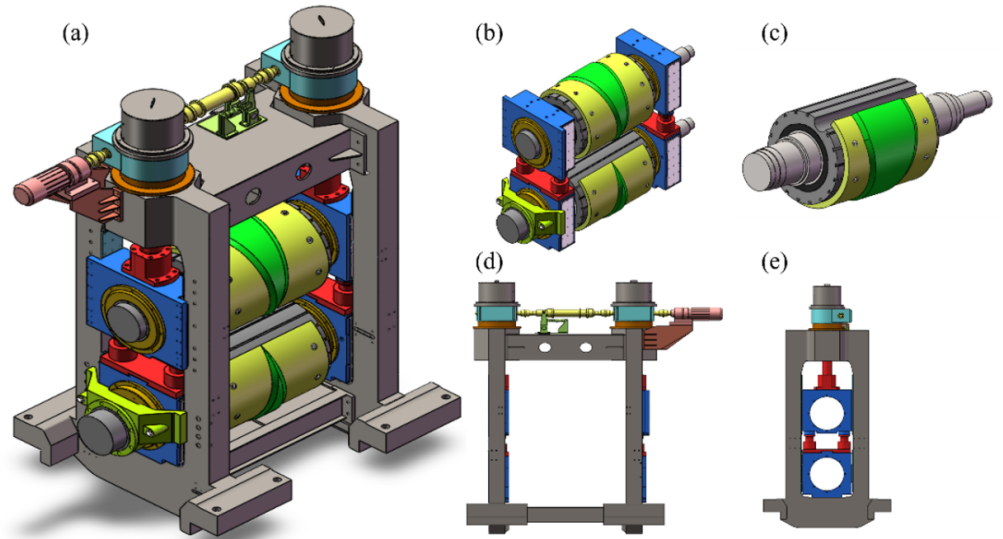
The large axial Cross-Wedge rolling mill main structure detailed explanation (a) Rolling mill main structure; (b) Roll system; (c) Roll; (d) Frame; (e) Support structure.
